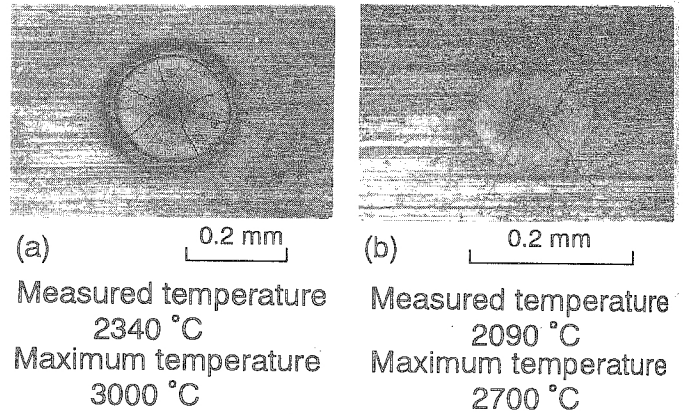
Weld profiles on PSZ surface irradiated with CO₂ laser
